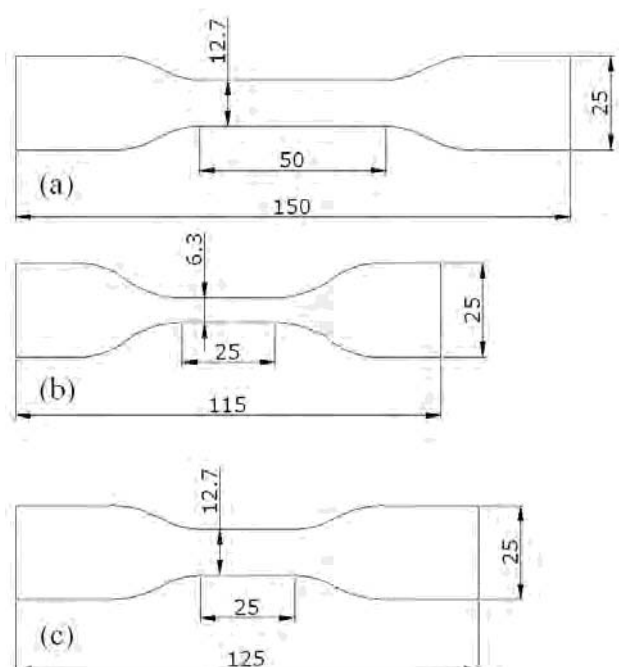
The dimensions of the dumbbell shape cutters/samples.
